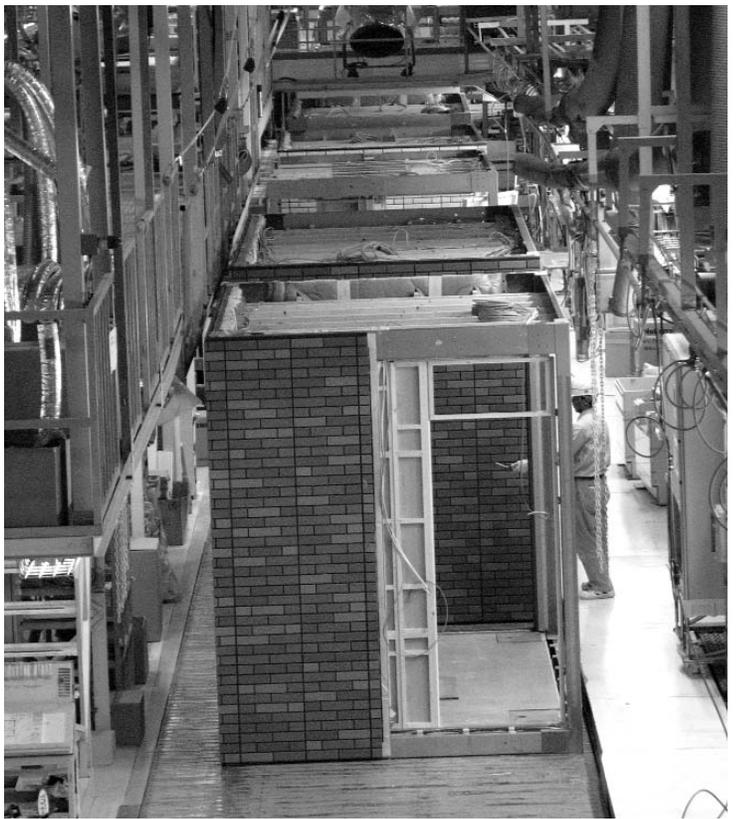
Light workload room modules starting down the fast line. Note the coiled wiring atop the modules. Module wiring, plumbing, and window installation are completed on the assembly line.
